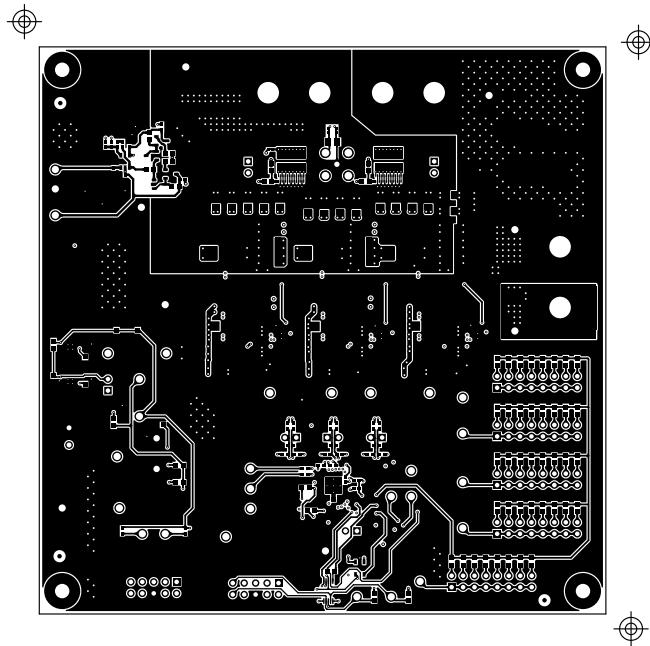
TPS59632Q1EVM-057 PCB Bottom Layer
